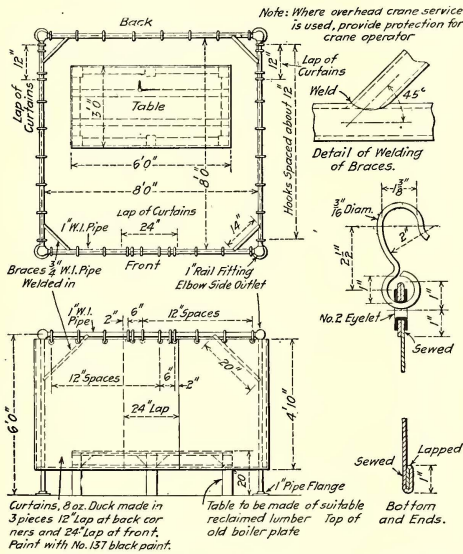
BOOTH FOR WELDING MISCELLANEOUS PARTS
